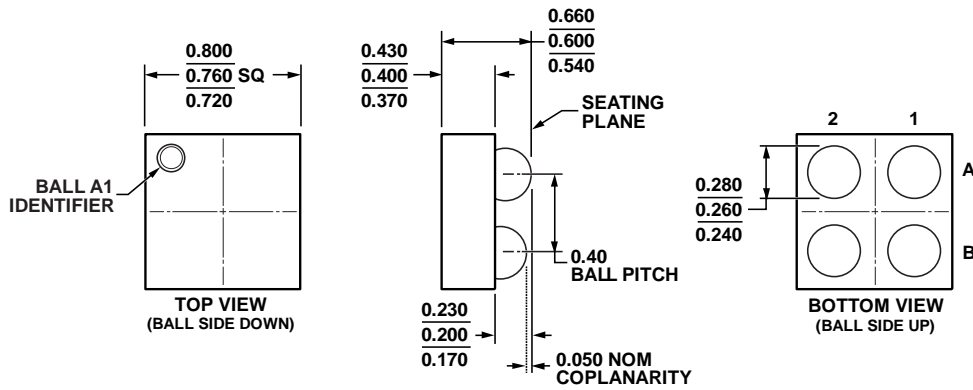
4-Ball Wafer Level Chip Scale Package [WL CSP] (CB-4-3)
